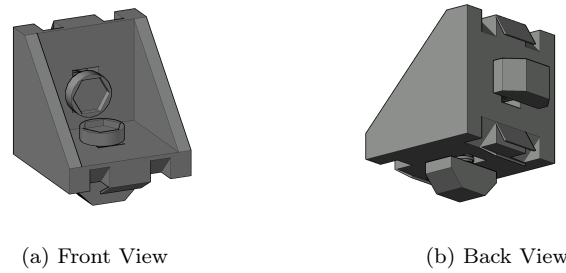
Angle bracket for aluminum profiles assembling: axonometric views.
